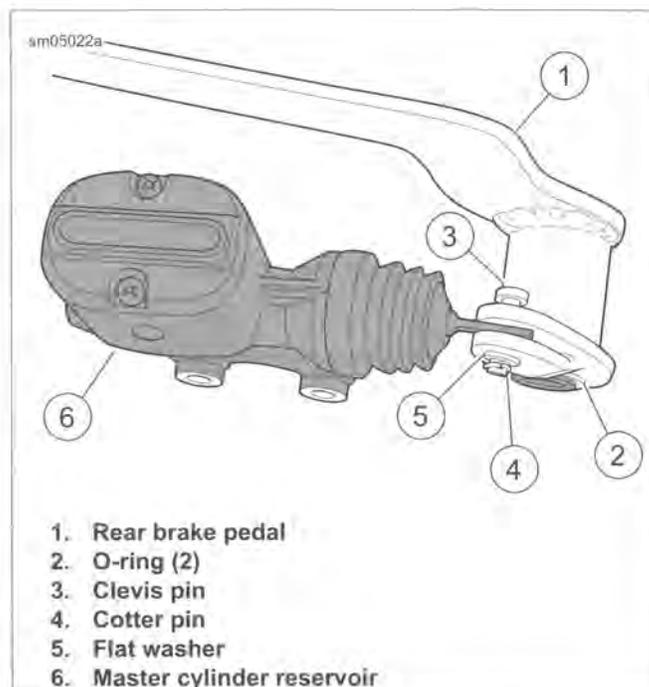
Rear Master Cylinder/Brake Pedal Assembly
